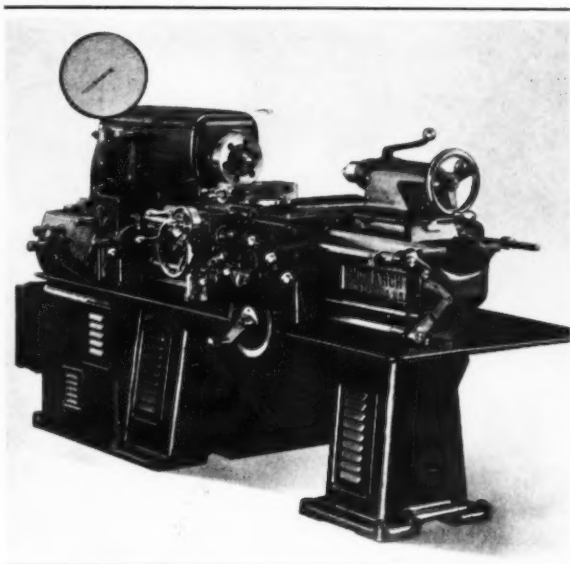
"Do-All" Machine Equipped with Power Work Feed
